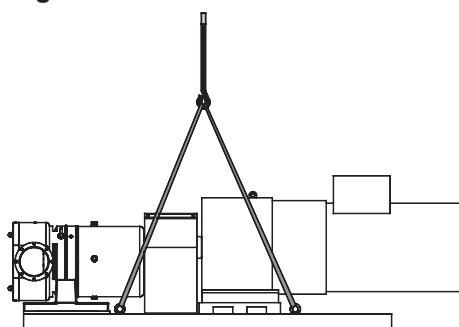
DW6 bareshaft pump: To be lifted with chain as shown in fig. 2.
